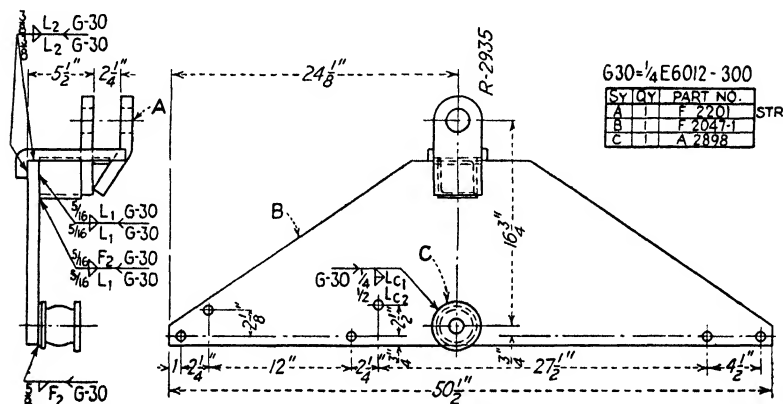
Before an inspector can determine the degree of quality he needs, the engineering information such as size, location, form, and type of weld plus the other information that can be made standard for workmen, foremen, and inspectors by weld symbols should be specified on the prints of the welded structure. (Courtesy of R. G. LeTourneau, Inc.)
